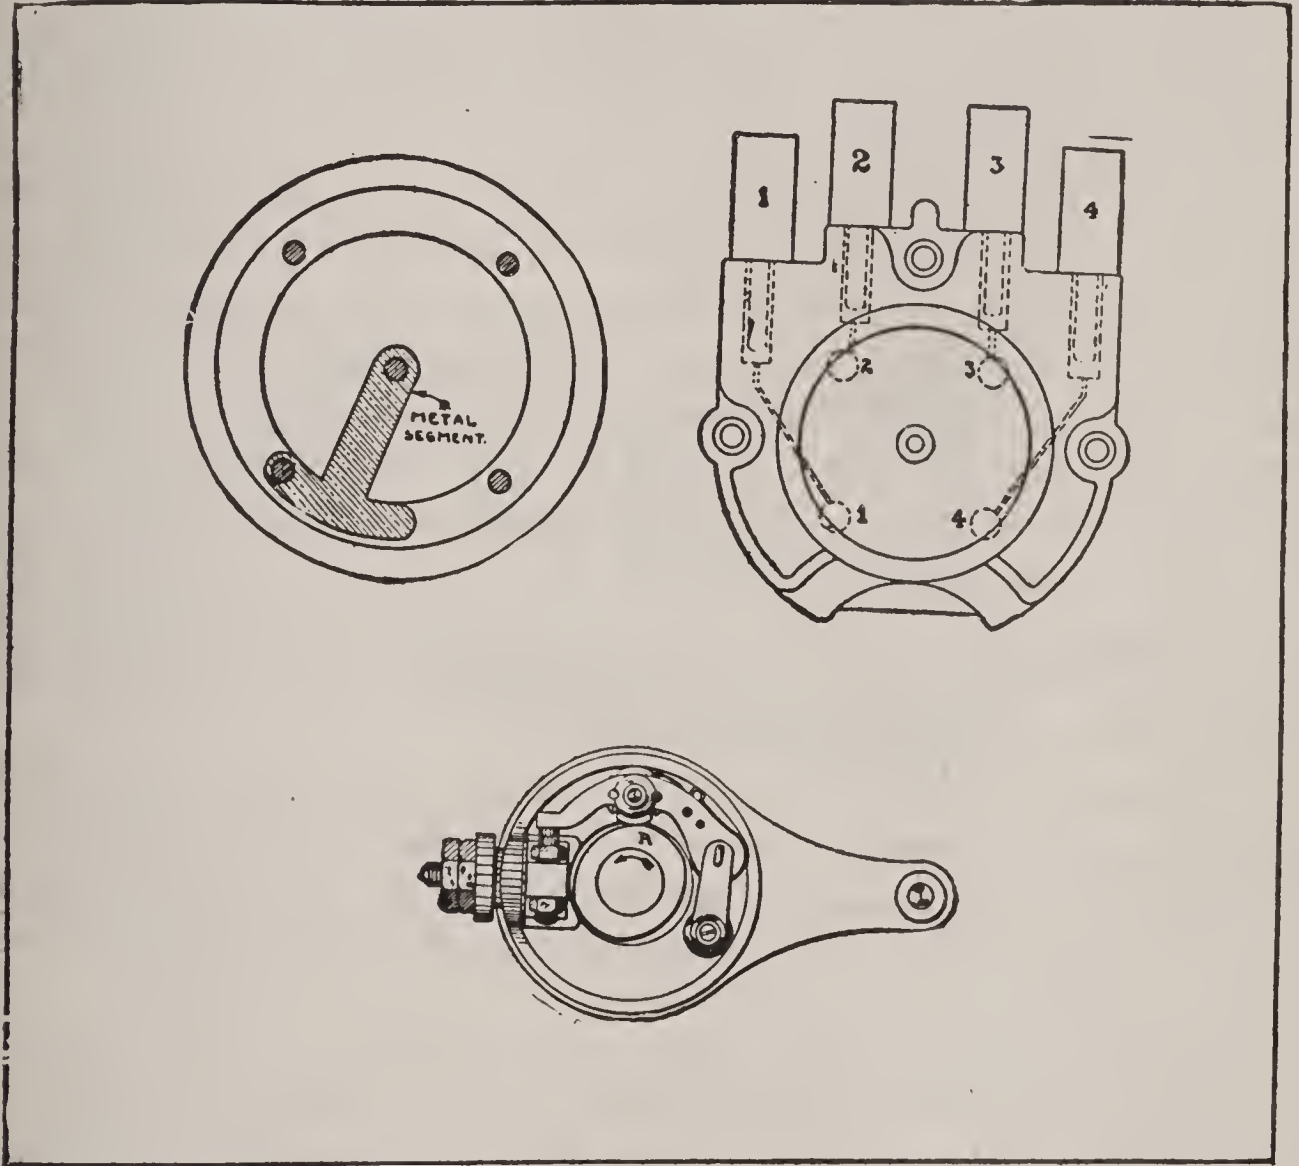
Contact Breaker and Distributor of Four Cylinder Magneto.
